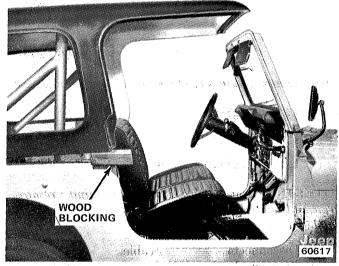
C-2 Hardtop Enclosure Supported with Wood Blocking
